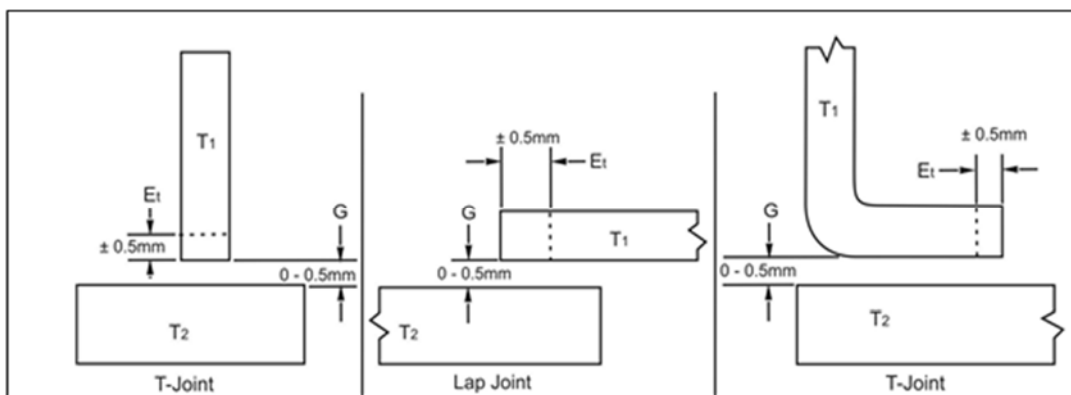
G-6: Joint design tolerance.^{A-12}
